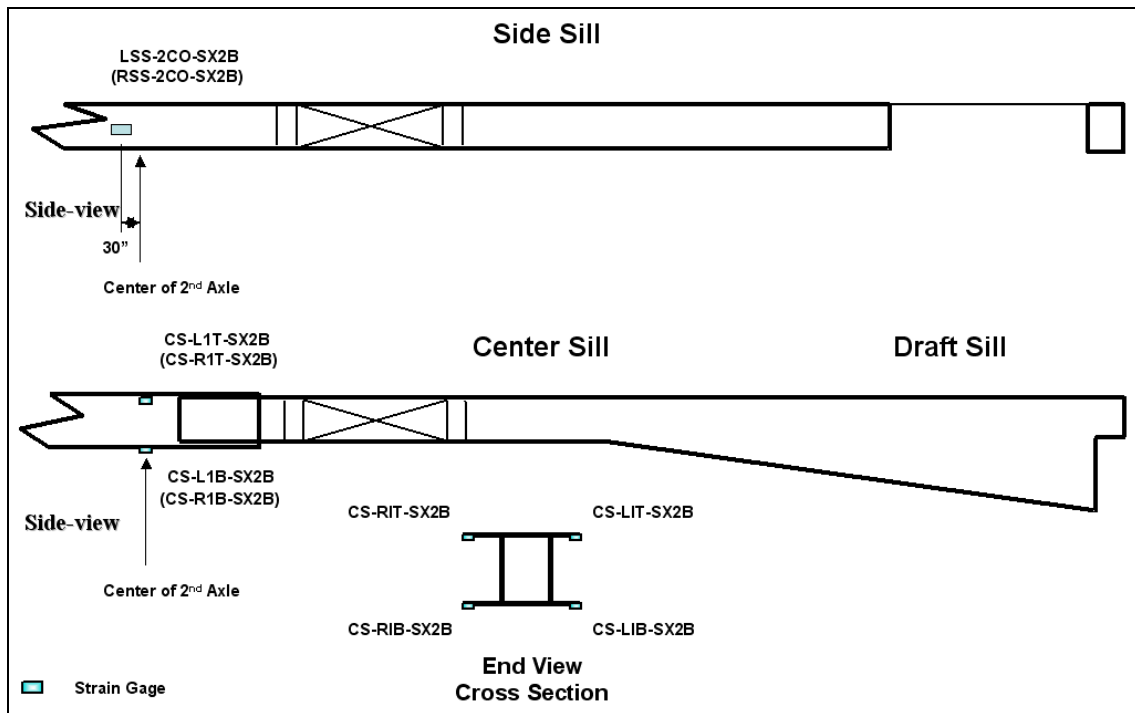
Strain Gauge Layout on Car 244 (Leading) Center and Side Sills
